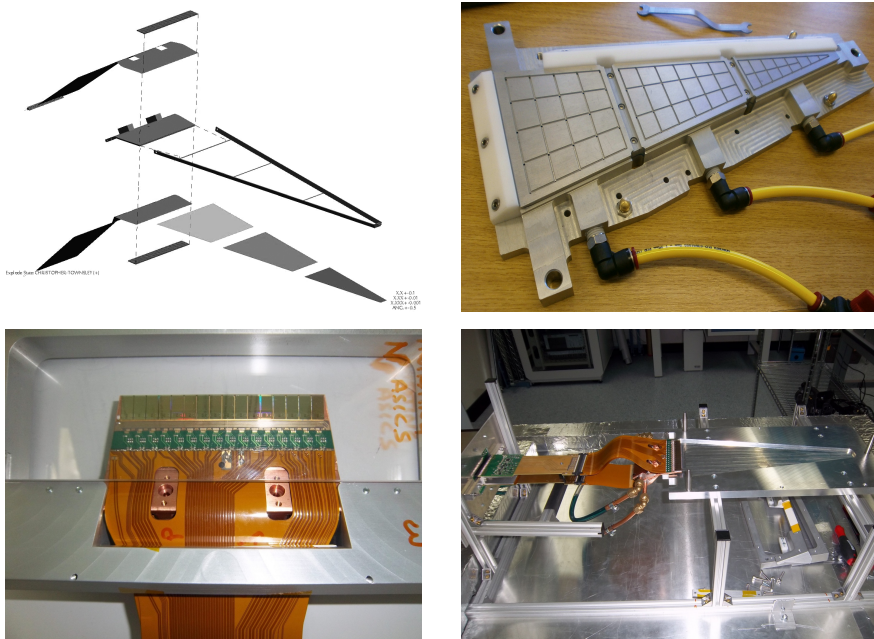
Si sensor production procedure (upper left); Alignment jigging (upper right); Board with 16 ASIC microchips (lower left) and Jigging for coupling of the ASICs to the Si detector (lower right).
